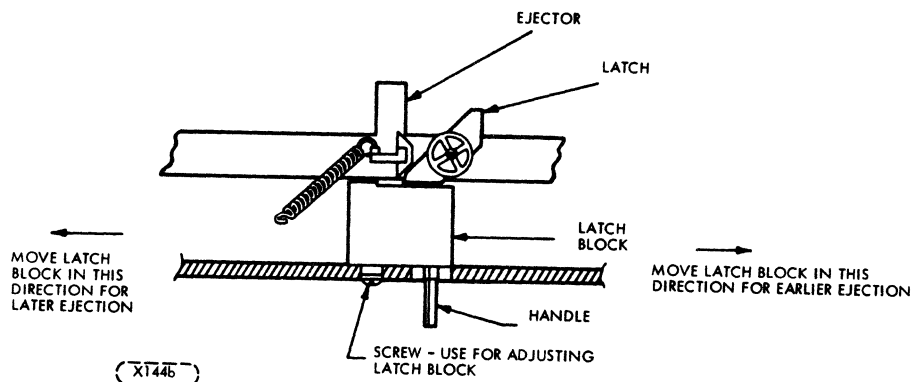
EJECTOR, LATCH AND LATCH BLOCK
